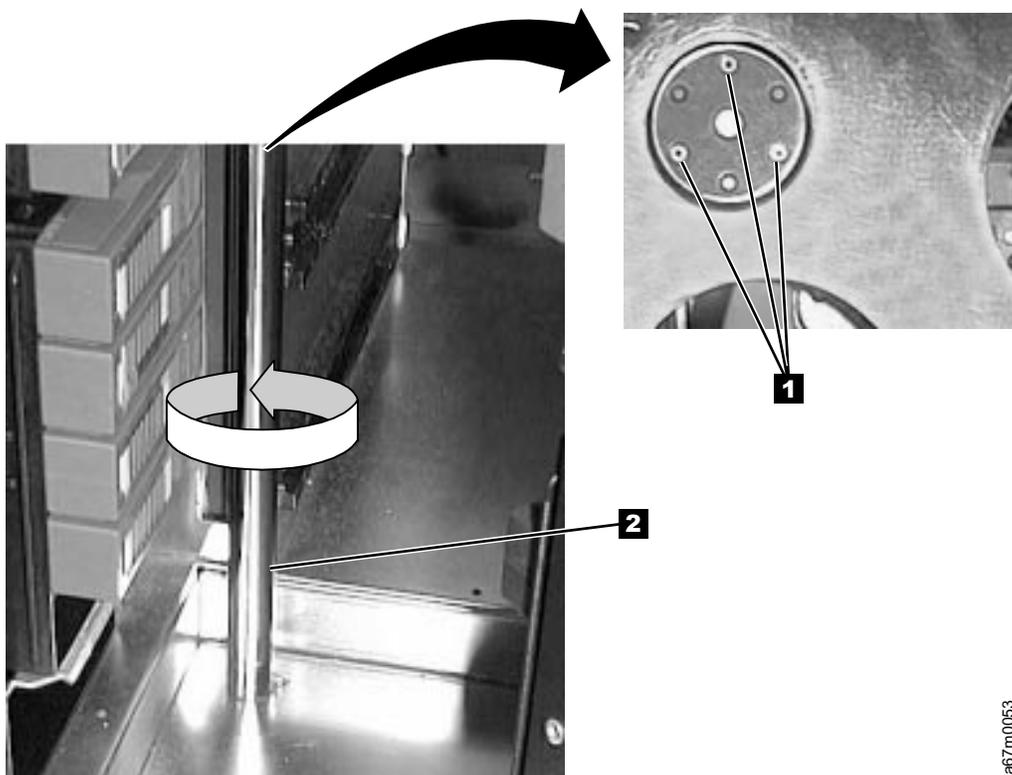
Y-Axis Drive Shaft Removal and Replacement
